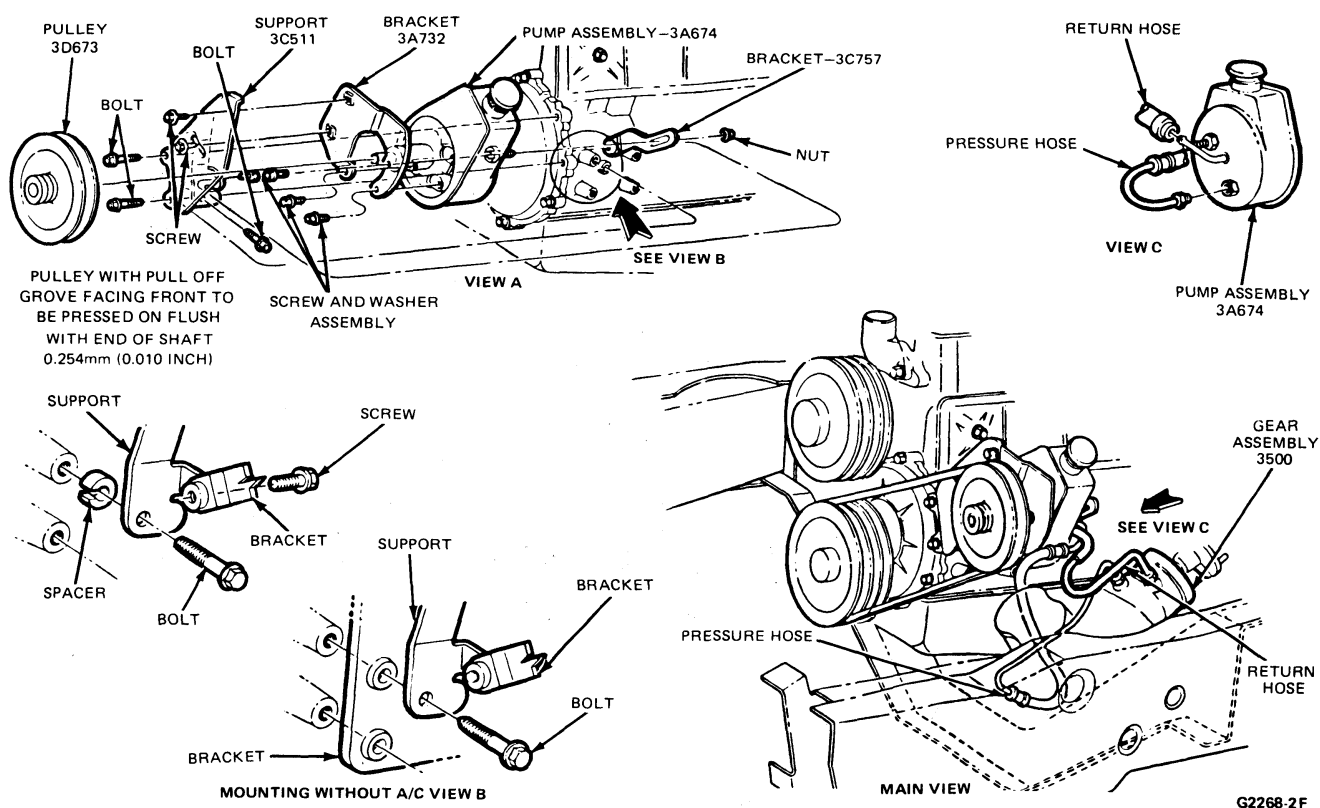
Power Steering Pump Installation—4.9L (300 CID) I-6 Engine
